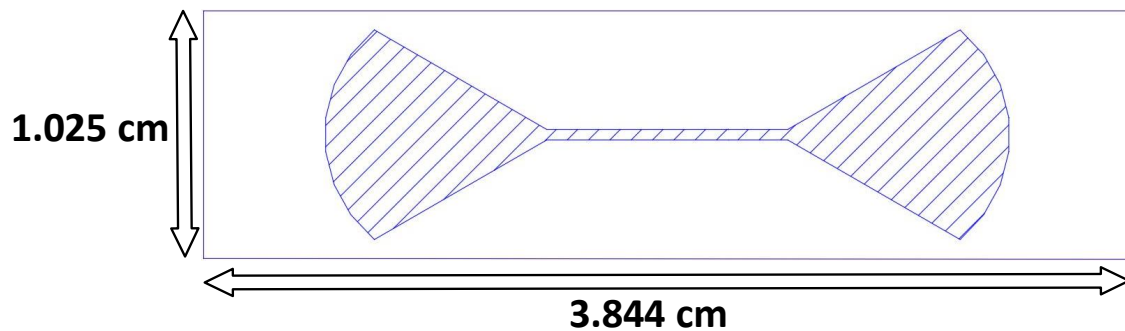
Assembly drawing of the V-band alumina test structure. The metal layer is hatched and the bare alumina is white. The thin film size is $3.844 \times 1.025 \text{ mm}^2$ and $100 \mu\text{m}$ thick.
